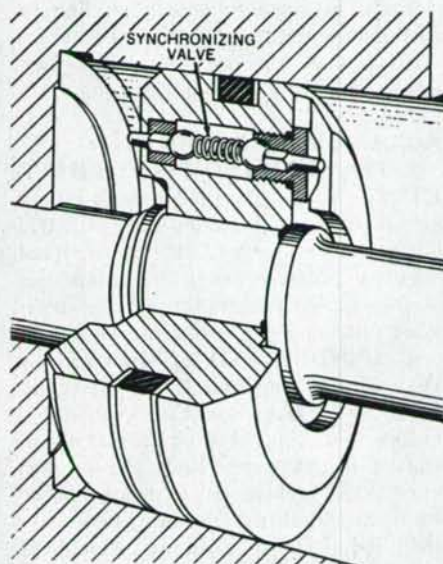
Steering valve piston must be synchronized with steering cylinders for full turning action. Synchronization is automatically accomplished. When control valve piston reaches end of its stroke, the extended rod unseats the ball check valve, allowing pressurized fluid to flow through piston until cylinders complete their travel.
